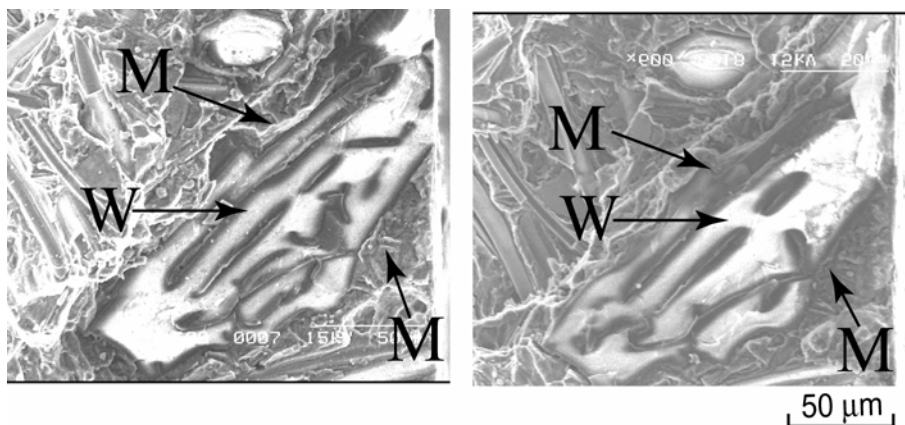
Matching fracture surface after fatigue fracture, maximum
